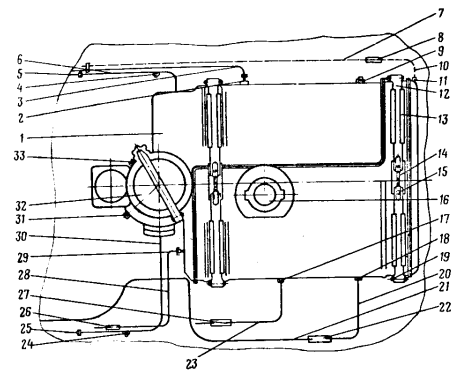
Attachment of Fuel-Oil Unit 317A and Connection of Pipe-Lines
